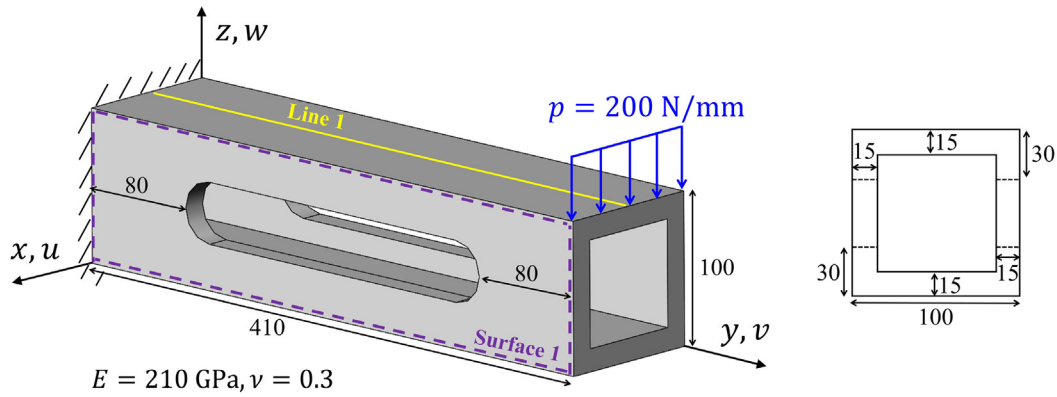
Description of machine tool jig problem; a uniformly distributed load  $p$  per unit length is applied, lengths in mm.
